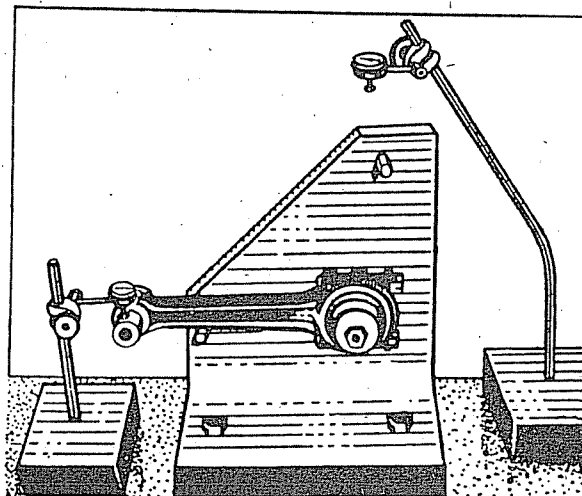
Checking alignment of Connecting Rod (horizontal).
